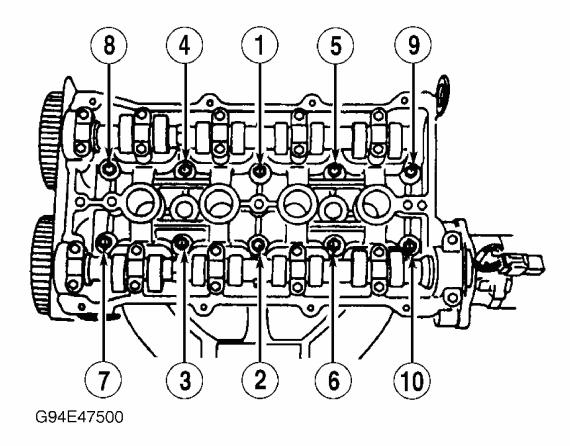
Cylinder Head Bolt Tightening Sequence Courtesy of MAZDA MOTORS CORP.
